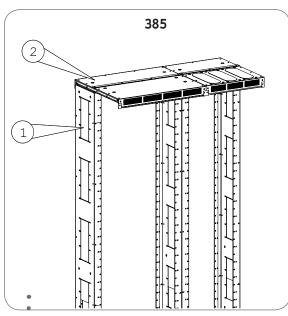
Installing roof assembly to a light cell centre.
